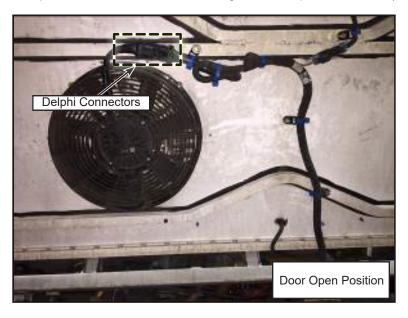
Typical Engine Door Fan Delphi Connectors Installation
